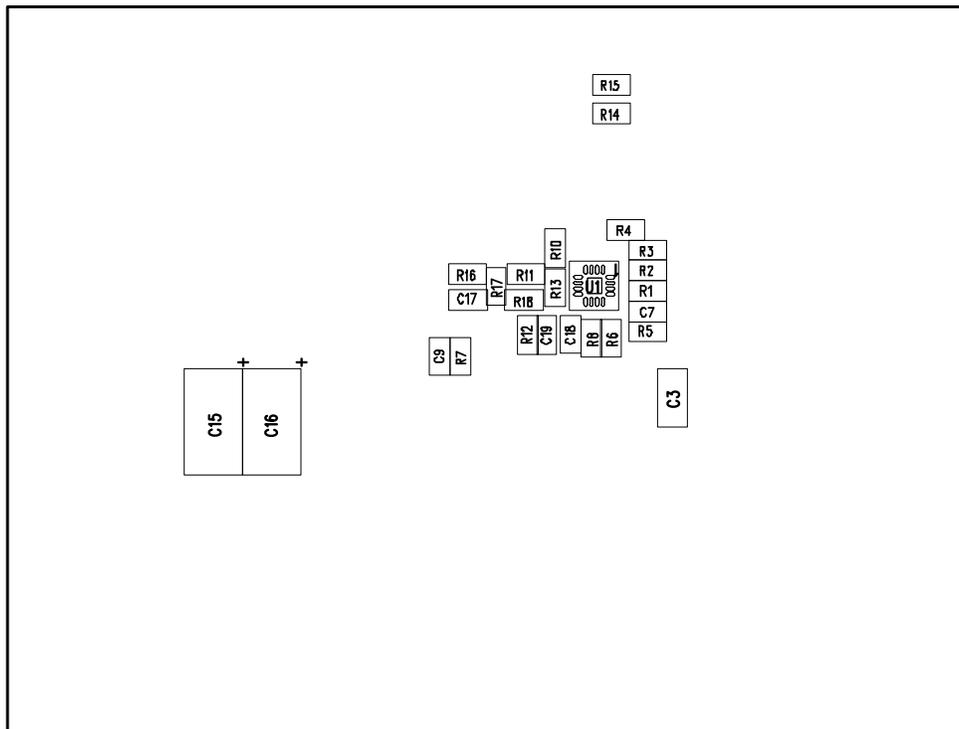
TPS53819AEVM-123 Bottom Layer Assembly Drawing (Bottom view)
